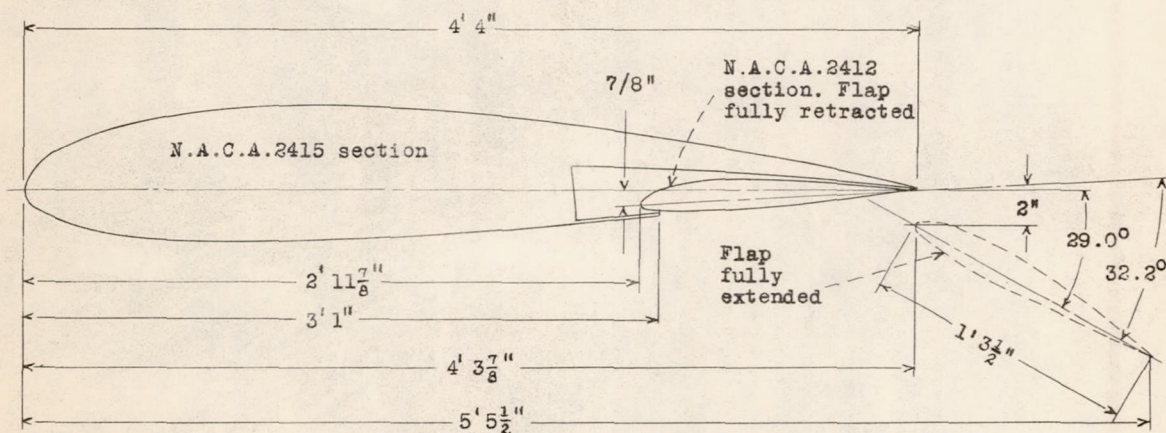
Sectional view of Fowler wing showing extreme positions of flap.
